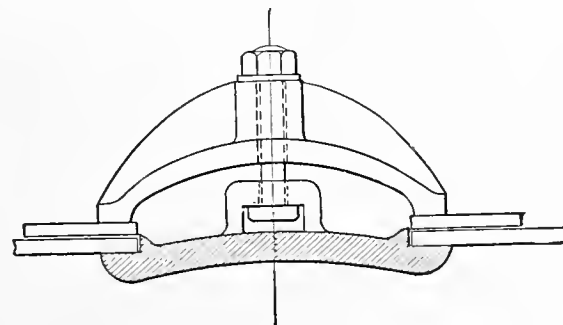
MANHOLE REINFORCED WITH STEEL LINER PLATE.
